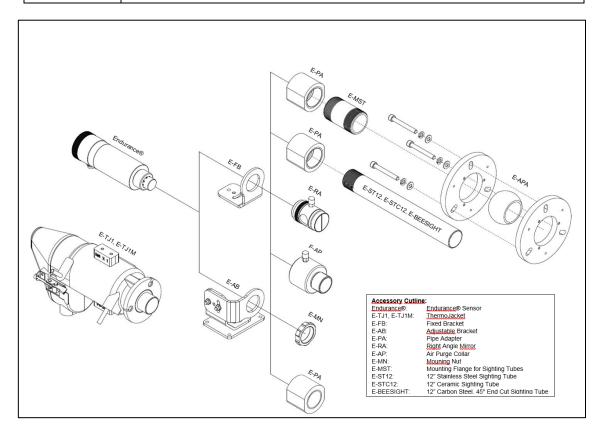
Extraction view of Endurance® sensor with mechanical accessories
